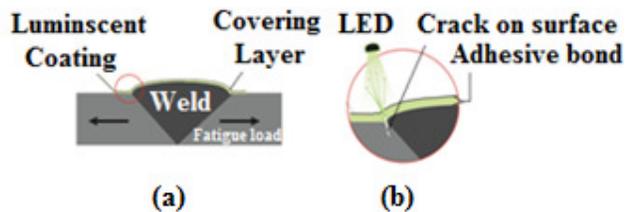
(a) Cracks in Weld seam applied with luminescence coating; (b) LED light reflects the emission from the crack on weld surface
